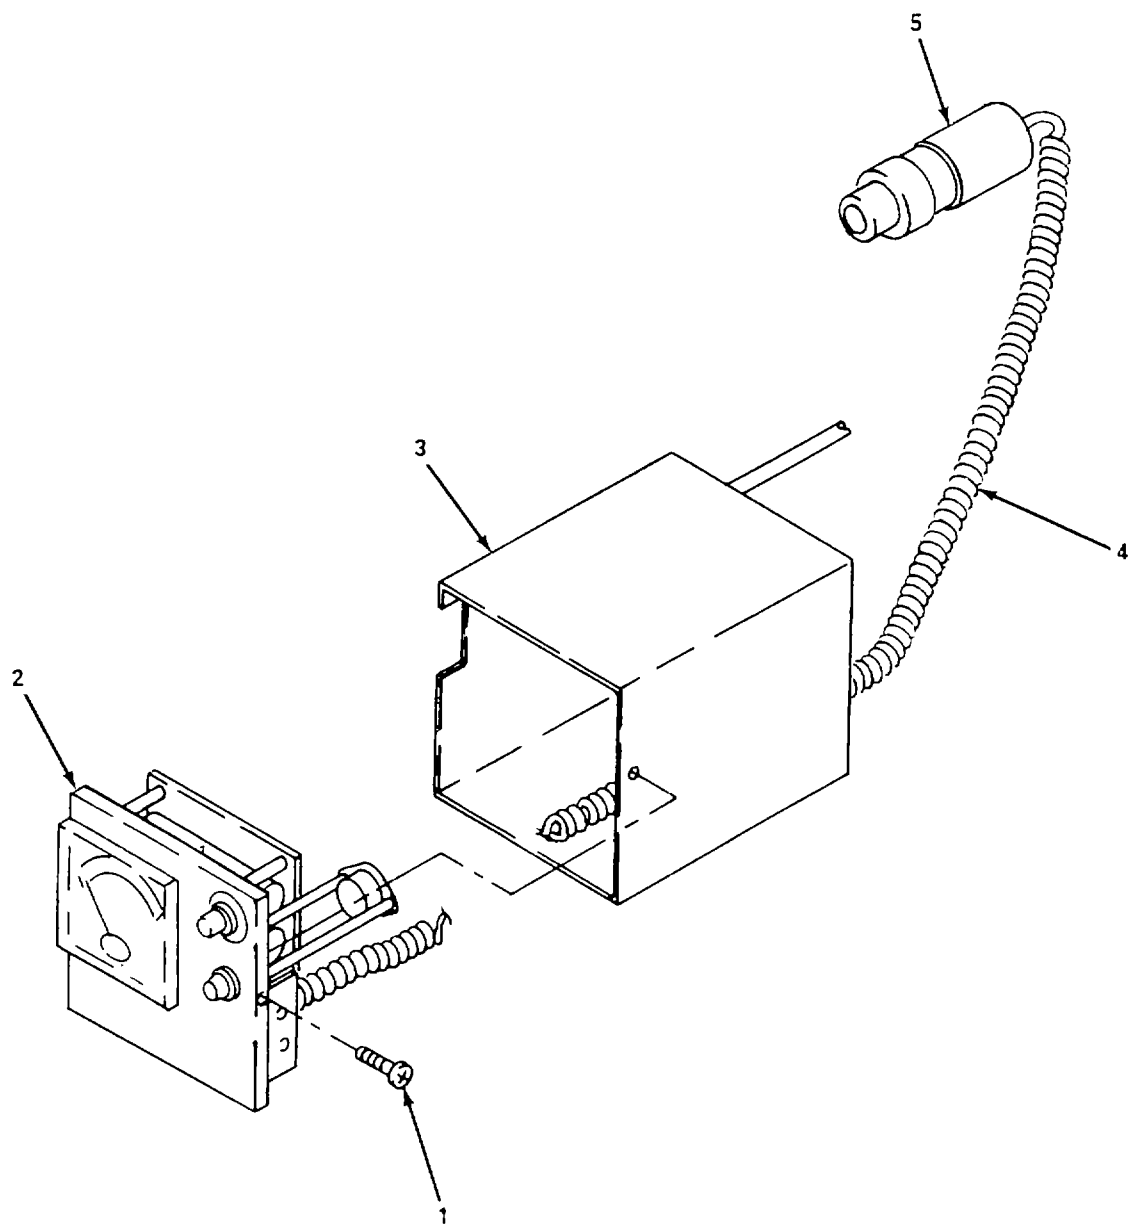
Portable Oxygen Analyzer Probe Assembly, Replace.
